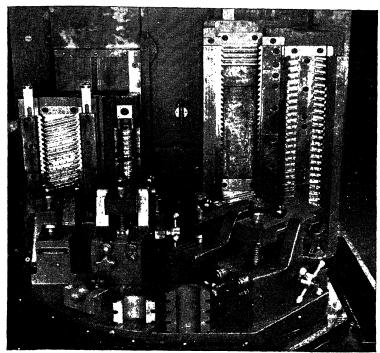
Close-up of a broaching machine, showing fixtures and sample work. The broaches are set to do both face- and edge-broaching. (Cincinnati.)
